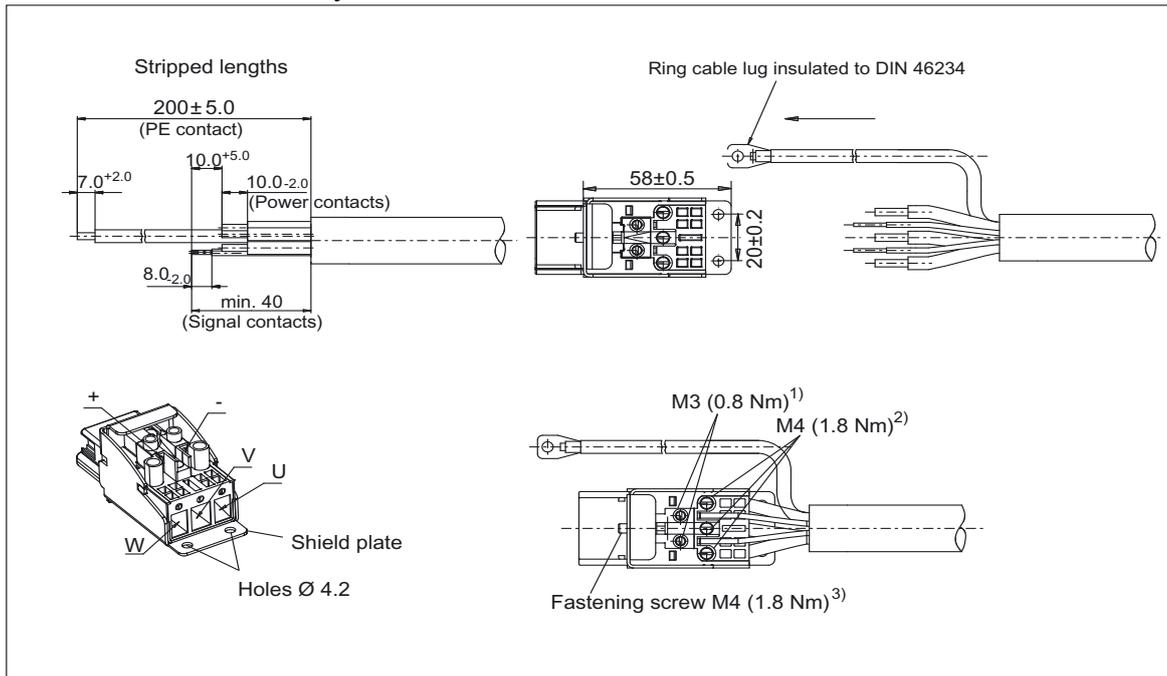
Setting up and installing the power supply connector (X1/X2)
